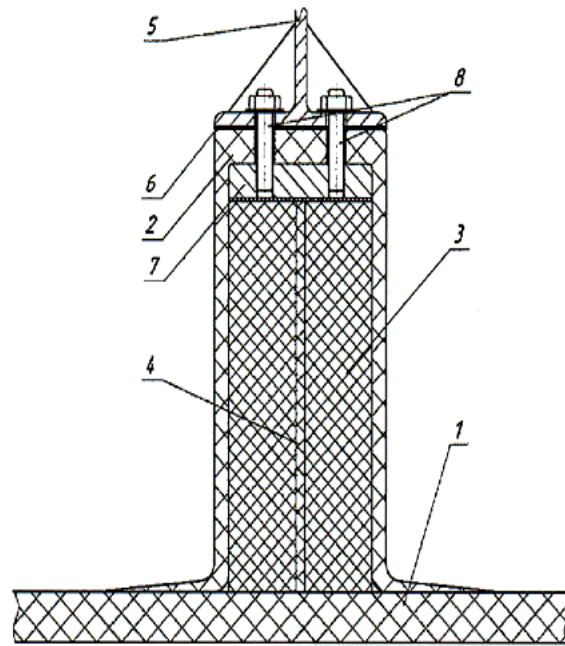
Joint of a support element of an engine (equipment) to the seating closed box section with the use of studs and metal embedded parts:
